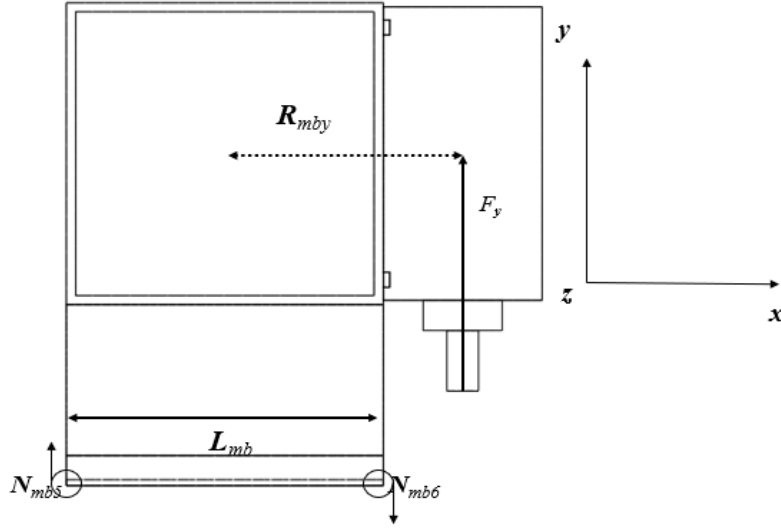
Side view of machine bed when +Y directional machining force applied to tool.
